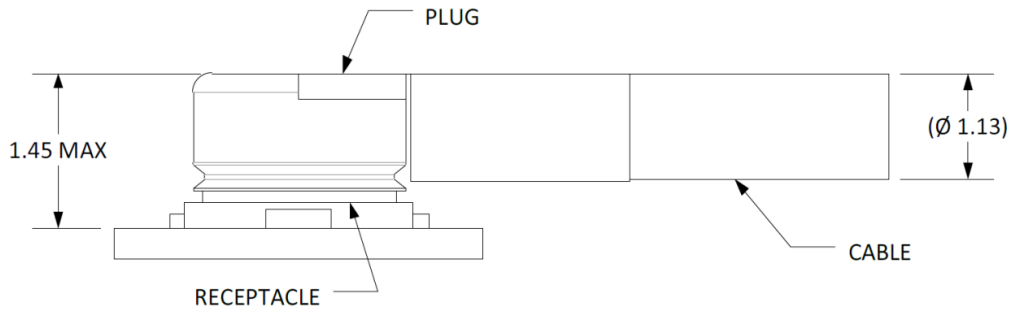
Connection between Receptacle and Mating Plug Using $\varnothing 1.13$ mm Coaxial Cable
